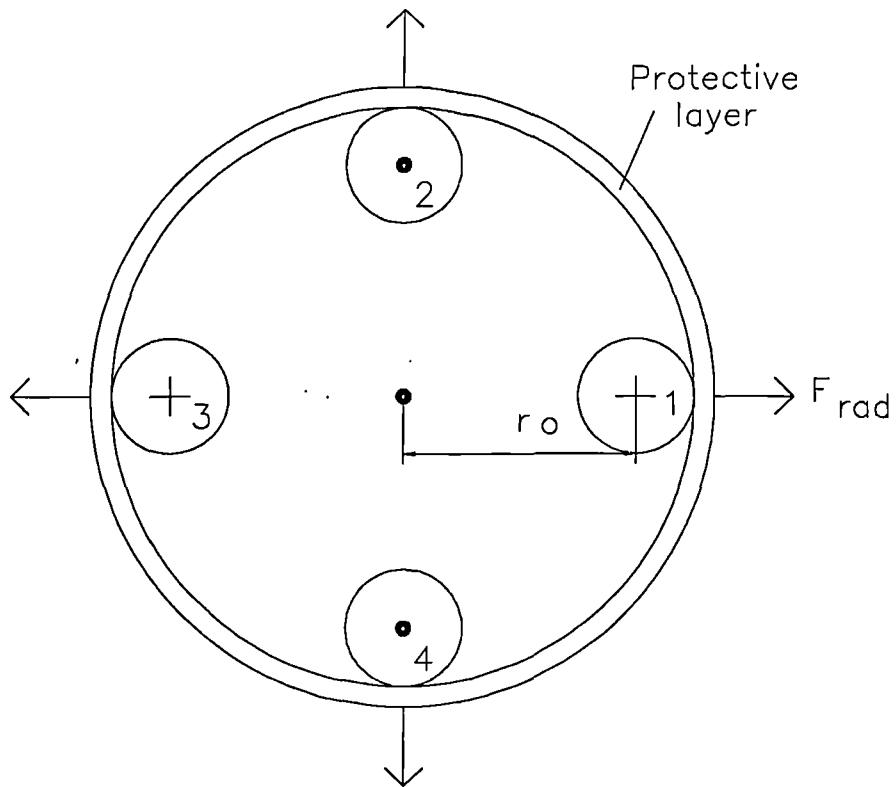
Cross-section through a 4-pole, internal single sided, radial field magnetizing fixture
